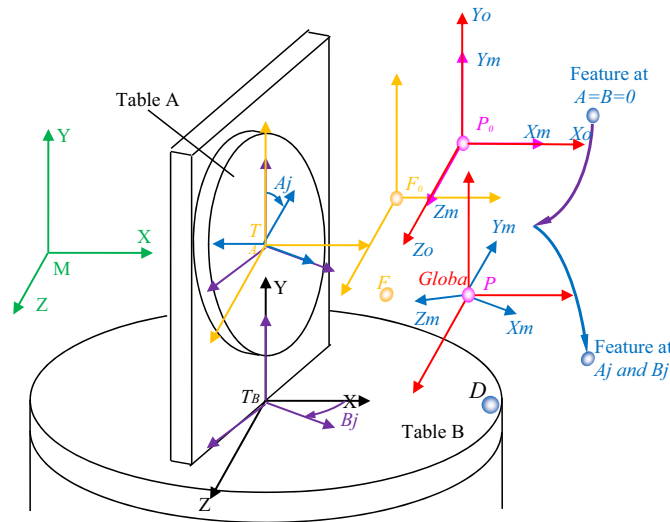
Global-machine-CMM coordinates, 5-axis A- and B-tables machine.
